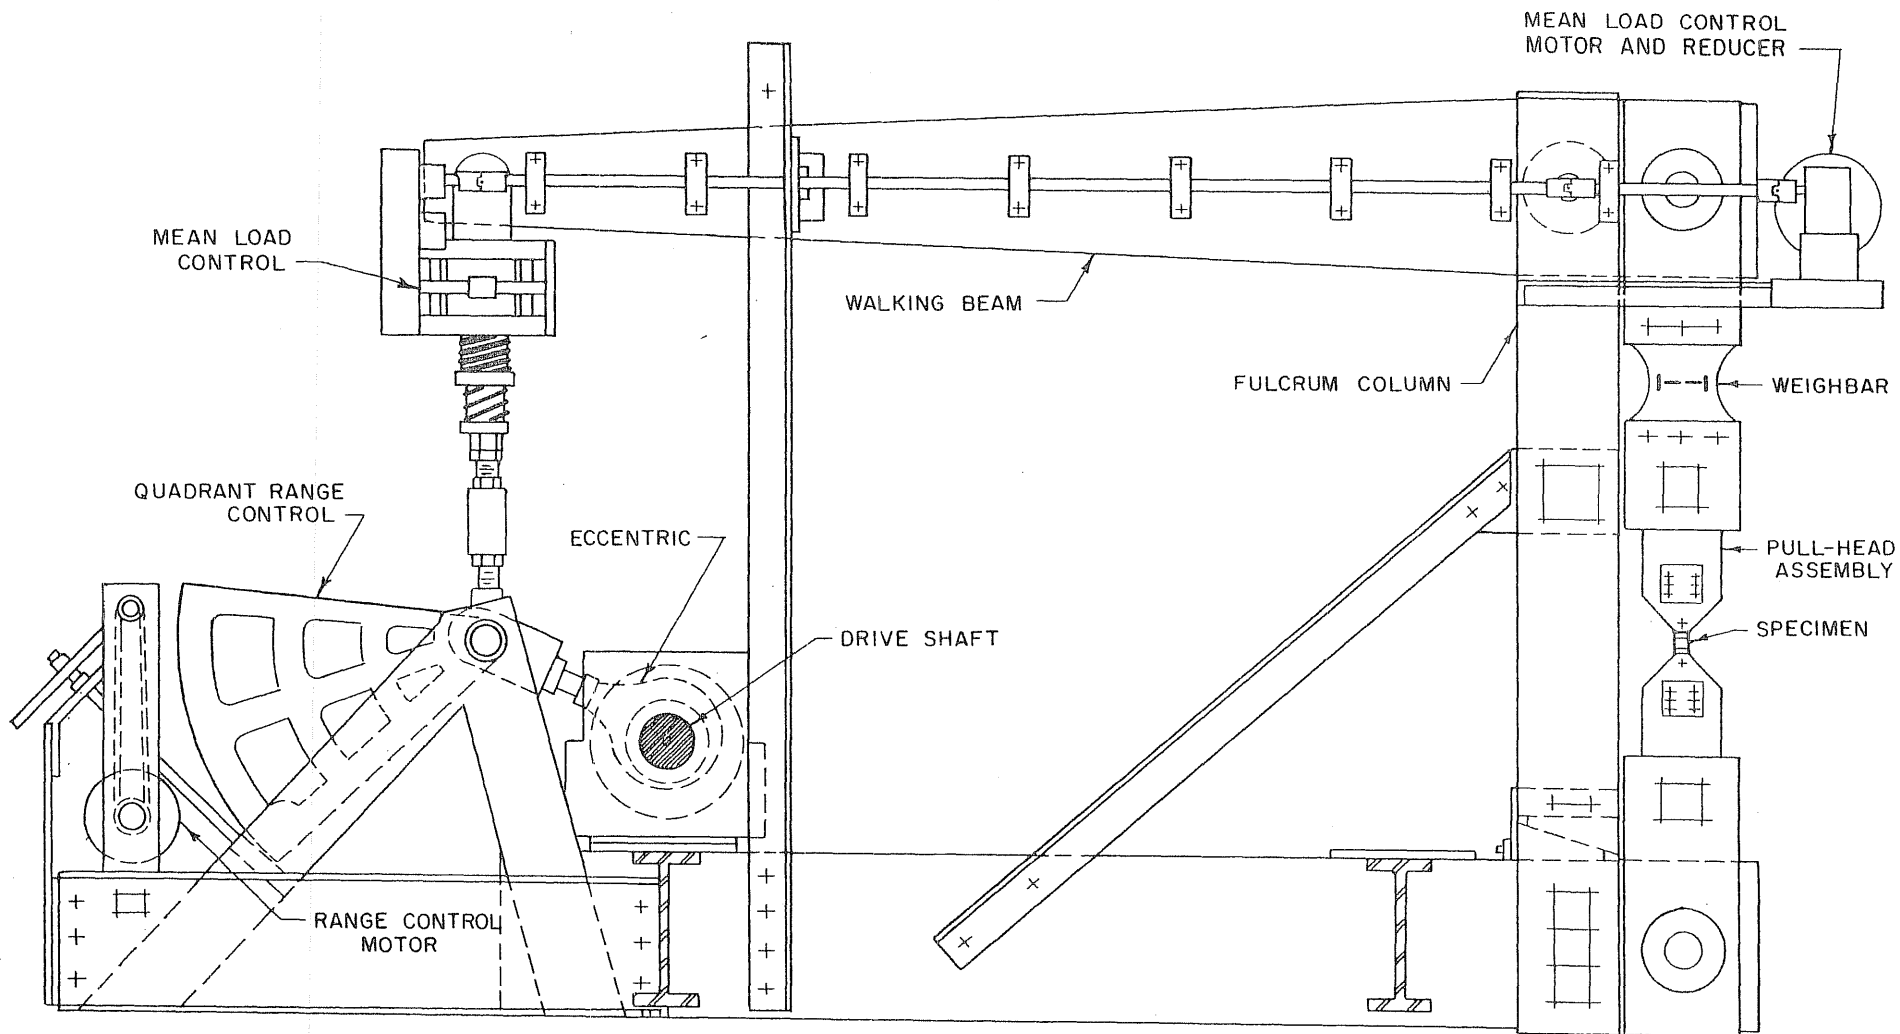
50,000 LB. FATIGUE TESTING MACHINE
